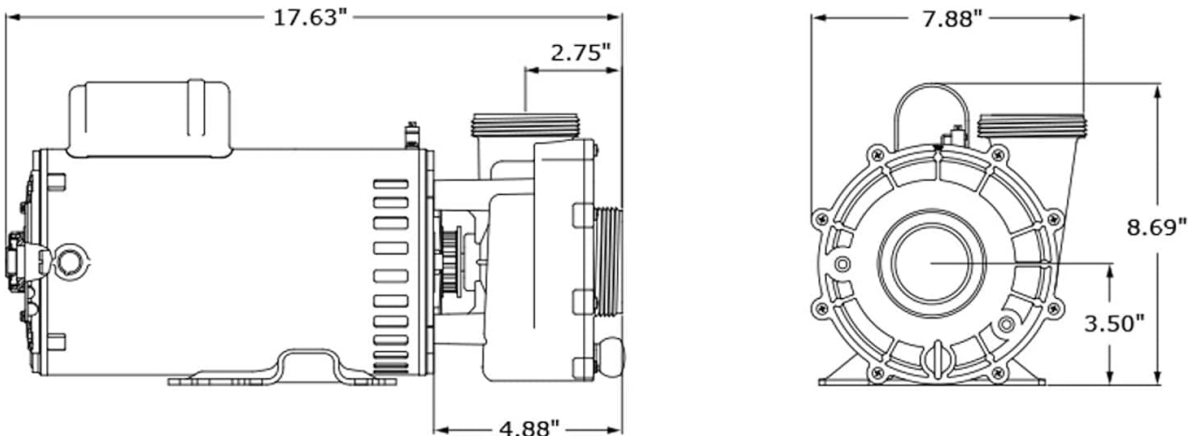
Dimensional drawing of the FMXP2E pump, indicating overall length, width, and height for installation
